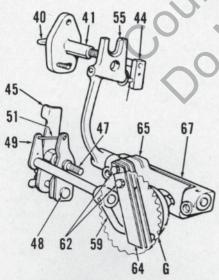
Diagram of governor mechanism. Refer to text and Fig. L5-11 for parts identification.
